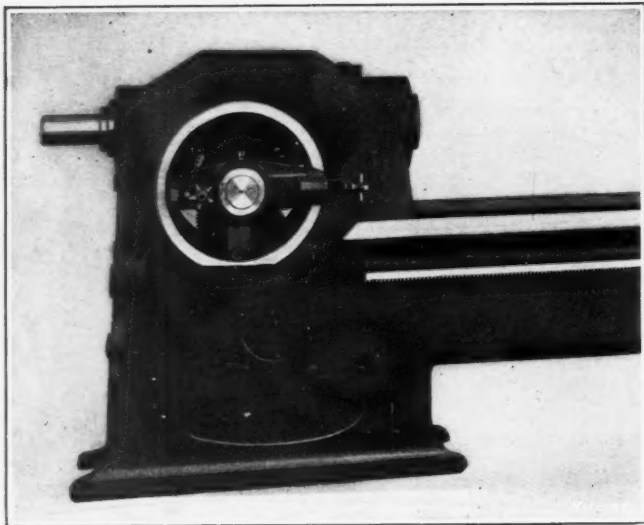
Opposite Side of Boring Equipment shown in Fig. 4—Attention is directed to Star-feeds for Boring and Facing Tools
